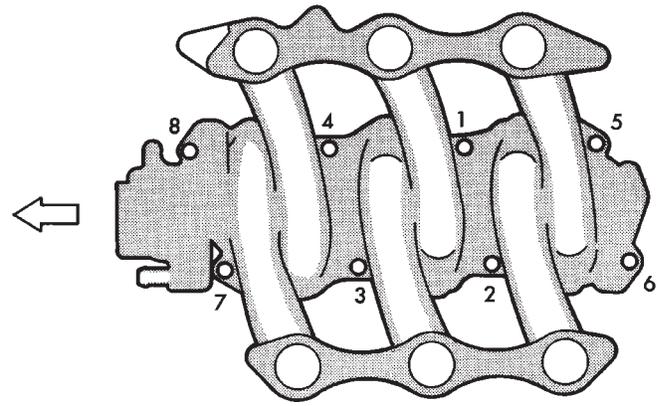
Nut Tightening Sequence for Intake (Cross) Manifold
